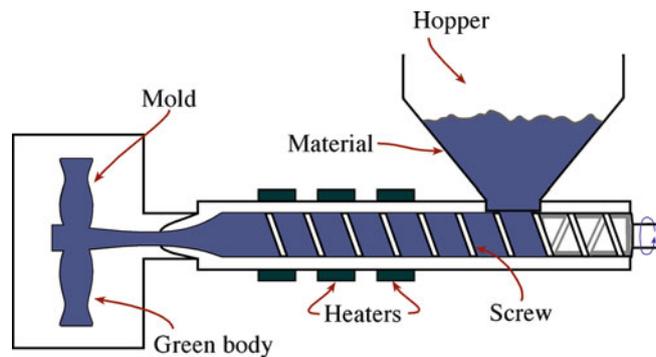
Cross-sectional side view of a screw-type machine.
